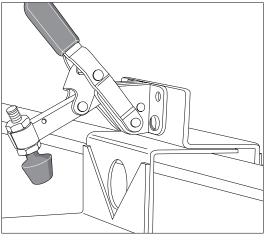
Lowering tool bar until front edge of tool holder is off the tool bar slightly.
